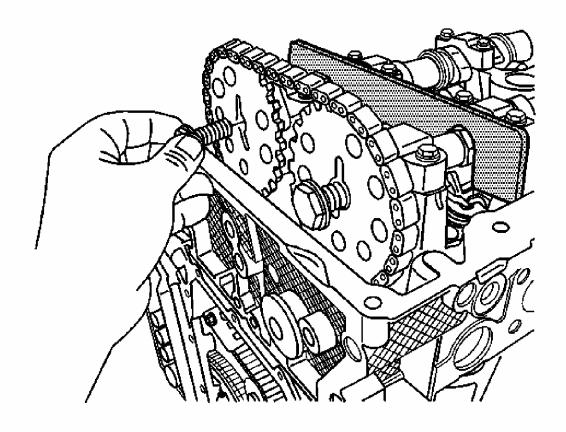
Identifying Left Intake Camshaft Sprocket Bolt Courtesy of GENERAL MOTORS CORP.
